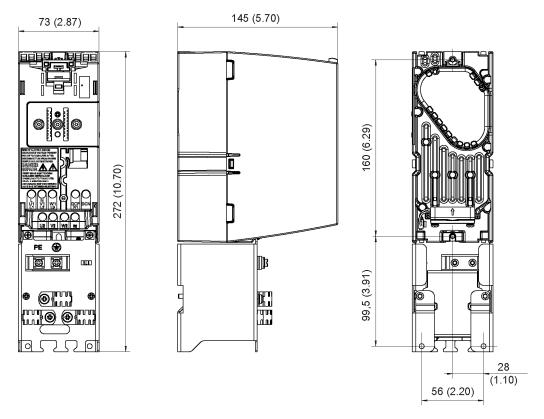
Dimension drawing, PM340 Power Module with screening kit, frame size FSA, dimensions in mm (inches)
